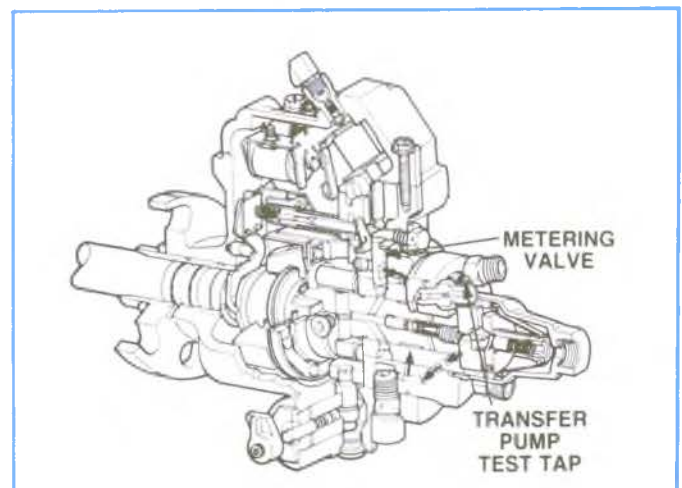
, Fuel Flow To Transfer Pump and Metering Valve.
